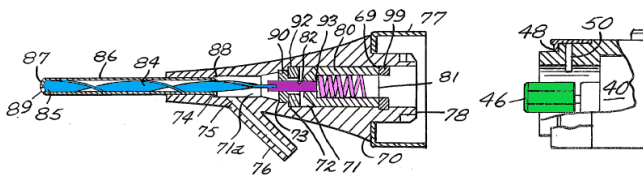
Schematic drawing of a mechanism to continuously drive a rotating cutter. Relevant components: 40 = motor, 46 = hexagonal drive shaft, 80 = connector between blade and drive shaft, 84 = twisted inner cutter, 86 = outer tube, 93 = compression spring. Adapted from: [86]
